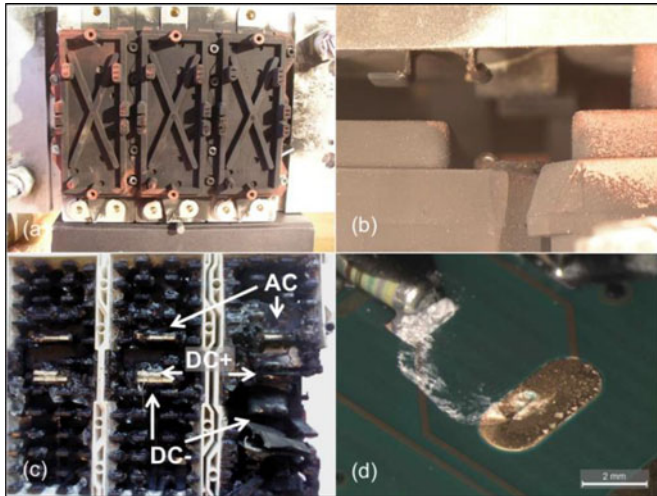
(a) and (b) Signs of high-voltage flashover between a screw and a PCB cooling fin, (c) melting pattern in module-internal busbars, (d) contamination and corrosion products on a gate-driver board.
